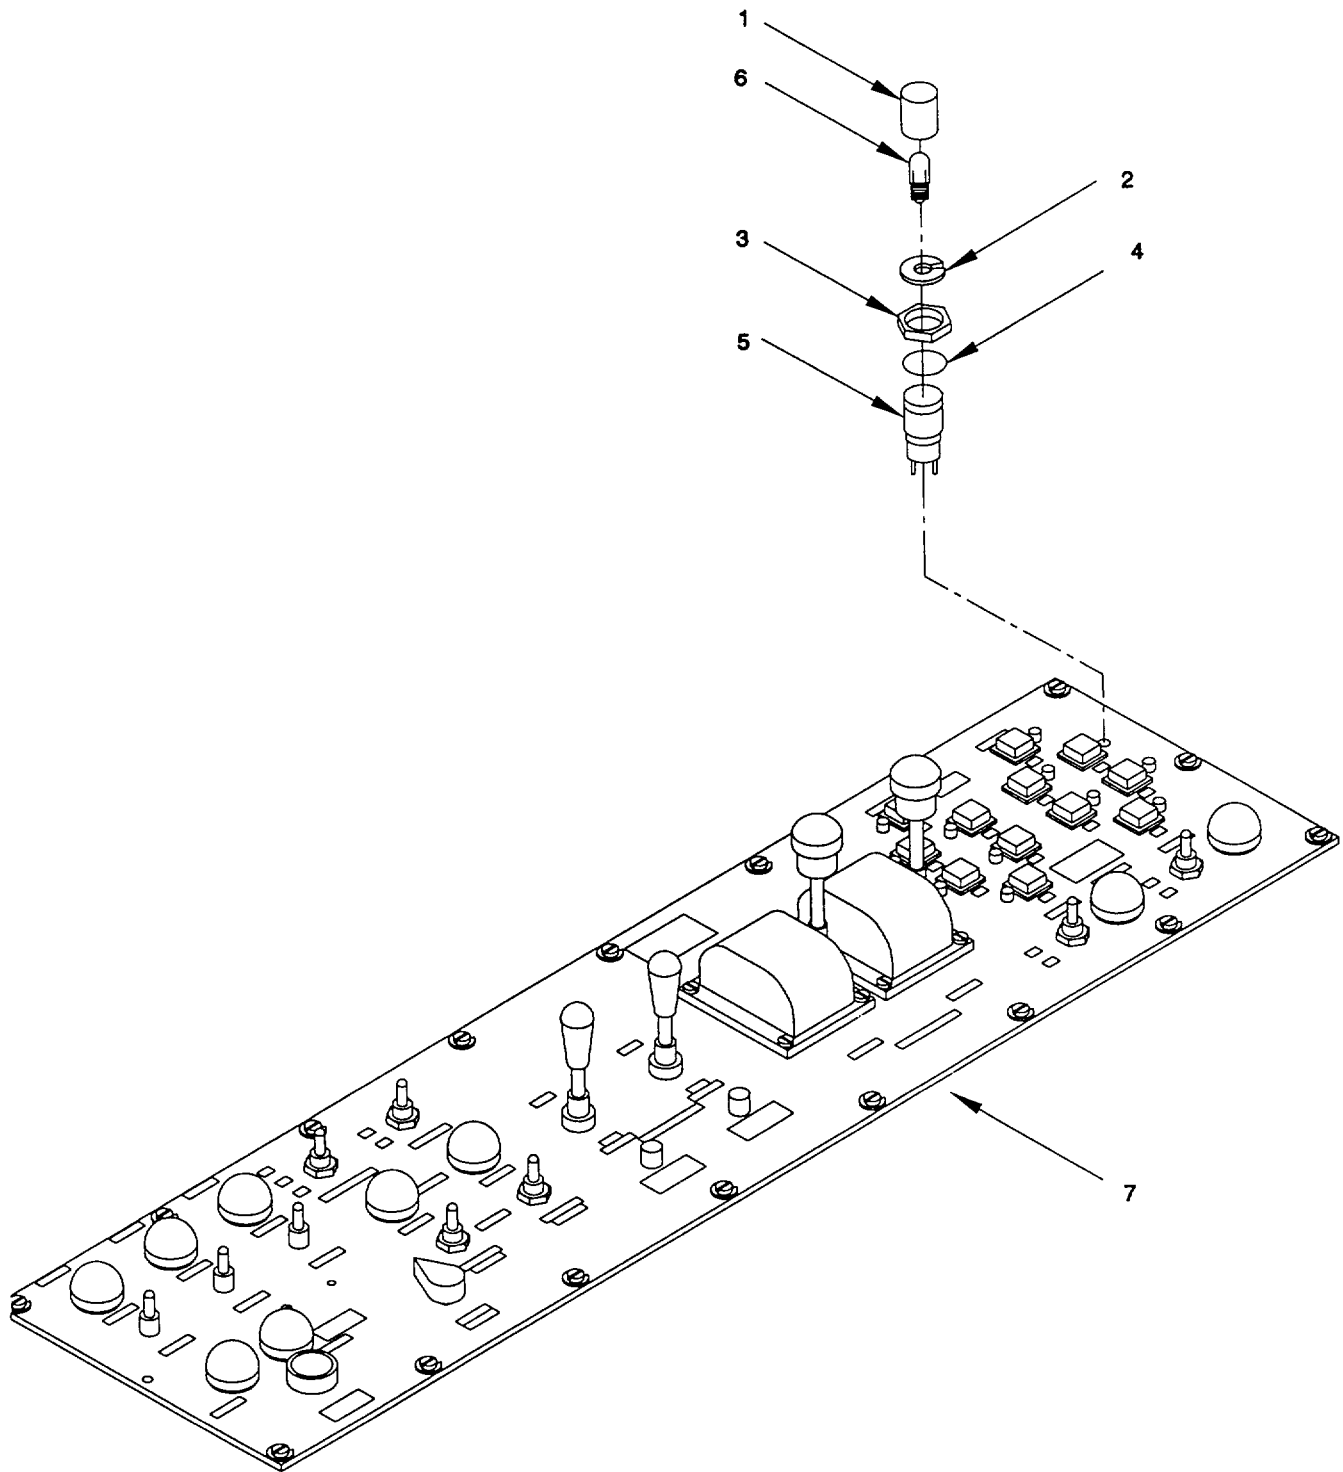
Indicator Lights, Bilge Pump System, Lower Control Panel "A2", Remove/Install.
